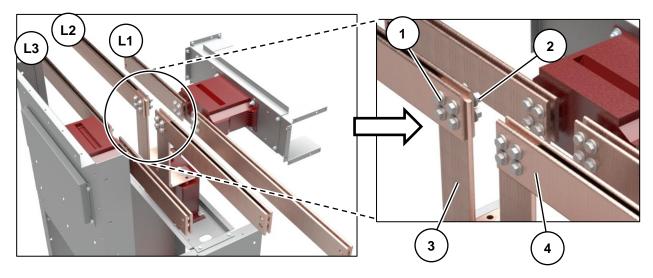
Busbar current metering panel: Busbar assembly phase L2 (for example, 2500 A busbar) Fig. 81: Details; the arrowhead indicates the inserting direction of the bolt
